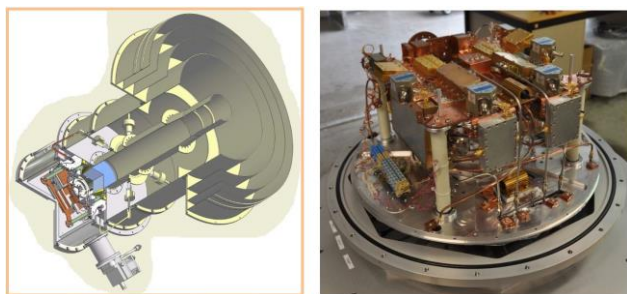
L-P band coaxial receiver: cross-section view of the full Front-End (left); view of the cryogenic assembly (right).
